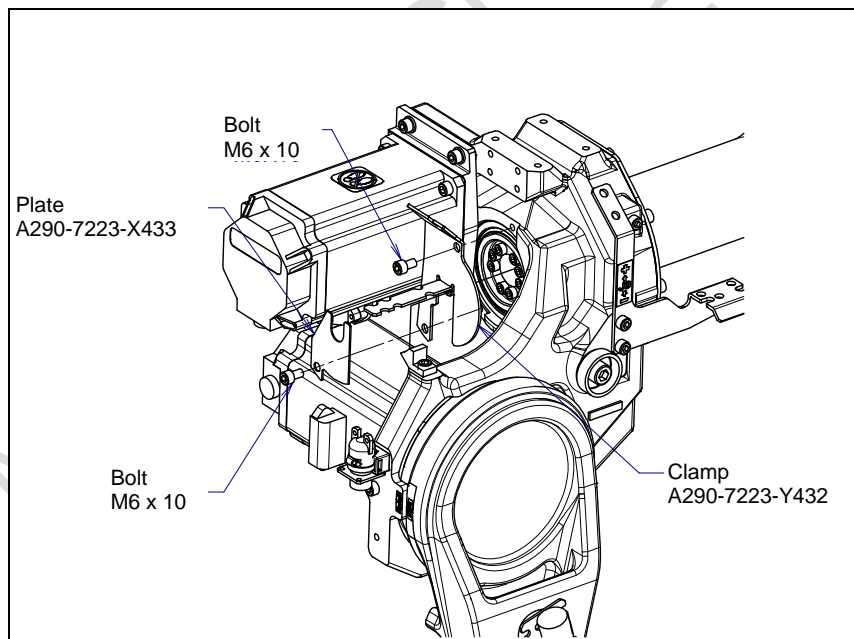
(d) Replacing the cable kit (J3 casing back side)
